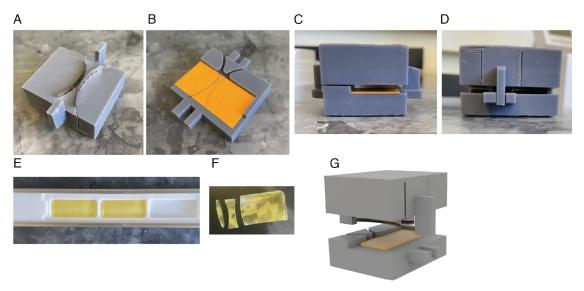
Picture of the (A) top of the jig with razor blades (B) bottom of the jig, top and bottom together from the (C) side and (D) front. Picture of the gels (E) in the mold and (F) after being cut. (G) 3D rendering of the jig with a sample (orange) ready to be cut
